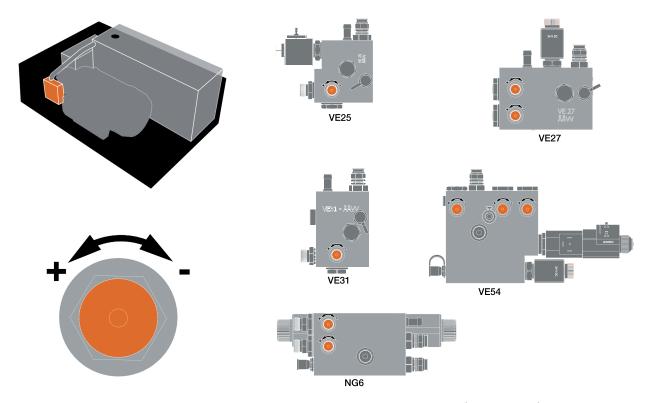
The valve package is mounted on the hydraulic power pack. Identify the type of valve package your product has. Adjust the lowering speed using the flow control valve knob.
